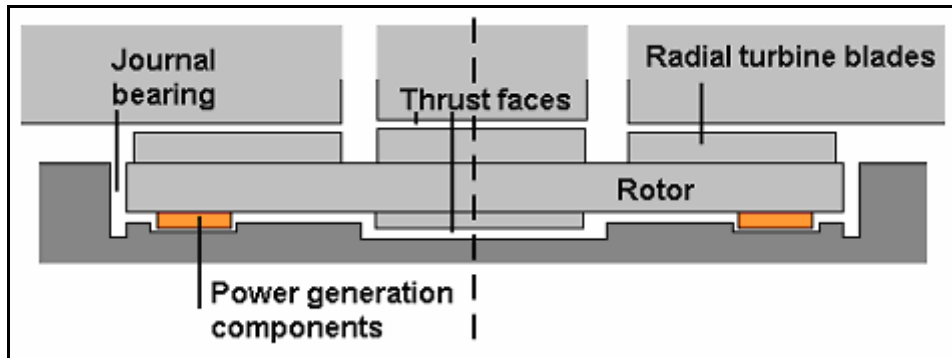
A cross-sectional view through a typical micro-rotor.
